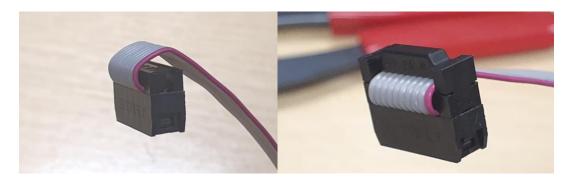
Bending the Ribbon Cable Over the Top and Attaching the Cable Fastener.
